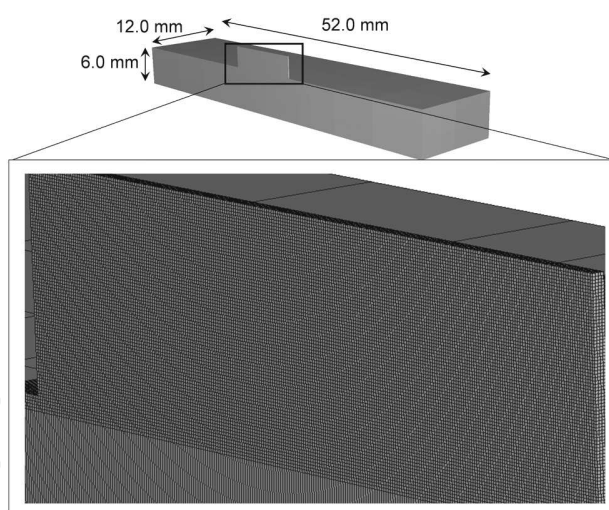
View of the substrate and the wall with a detail of the wall mesh.
